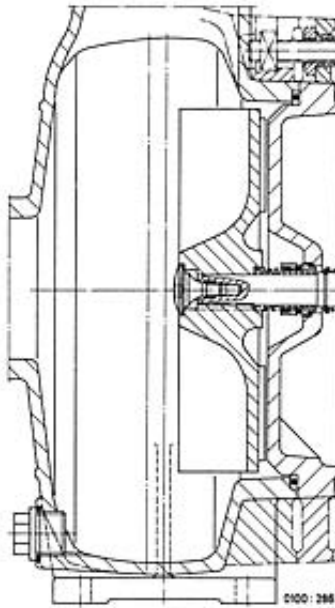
Torque-flow impeller of a faeces and sewage pump
